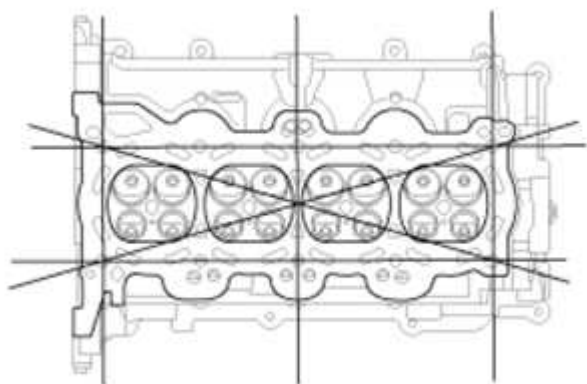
Measuring Contacting Surface Of Cylinder Block And Manifolds For Warpage
